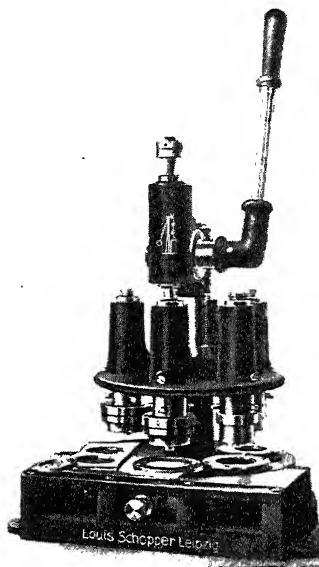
(Right)—Schopper ring-punching machine with revolving multiple cutter head.
